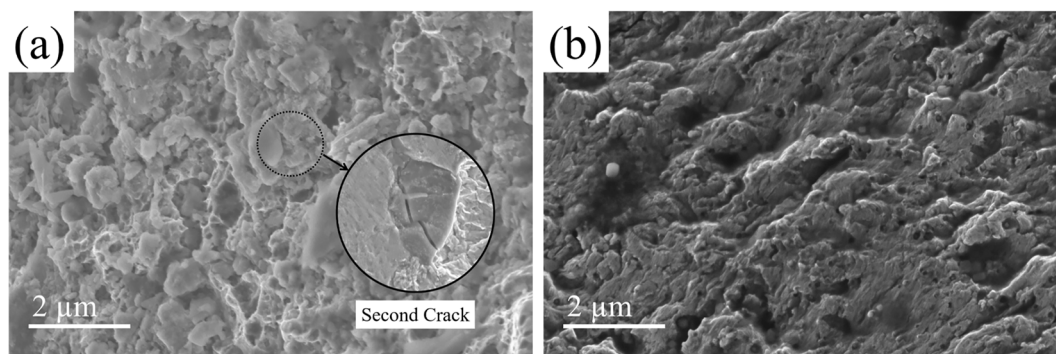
Cleavage steps: (a) fatigue specimen A-04; (b) fatigue specimen B-04.
